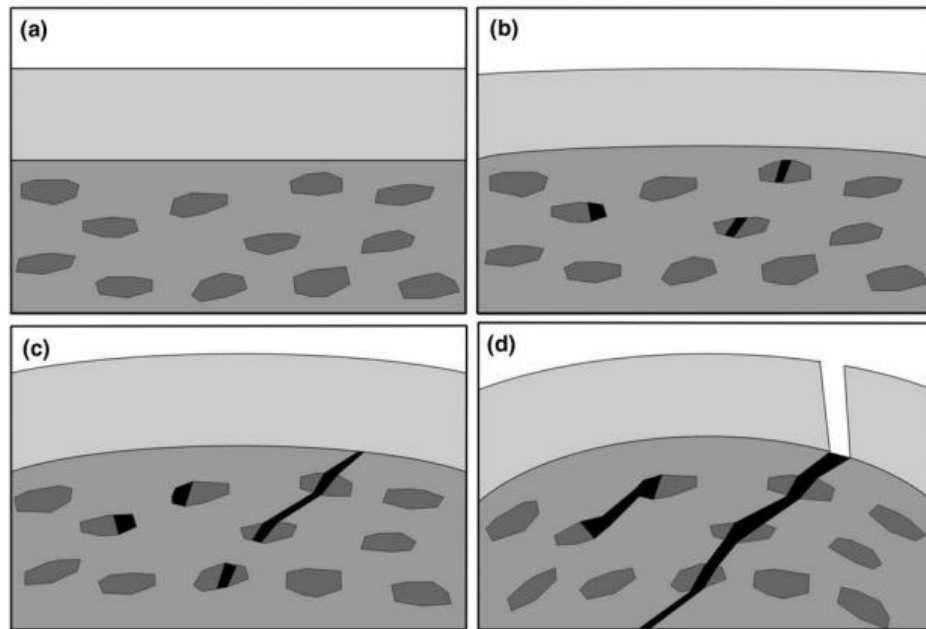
1. The schematic of fracture path progression in a clad sheet under bending [21] through (a) to (d)
